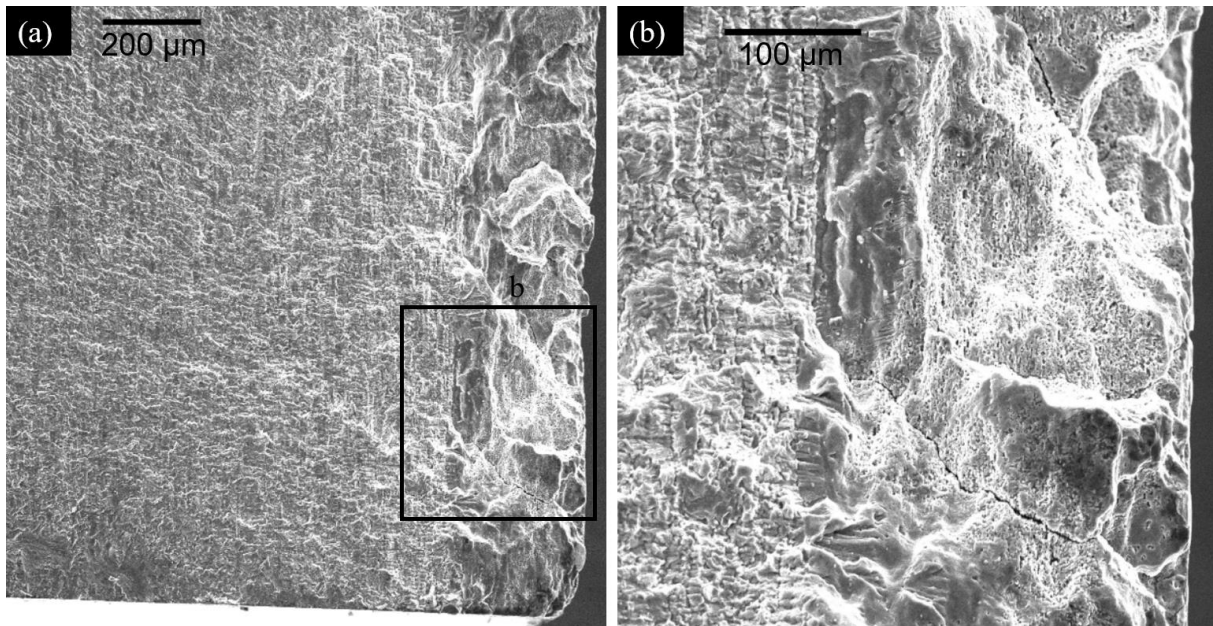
Fracture surface of glass bead blasted specimen with 12 h pre-corrosion.
